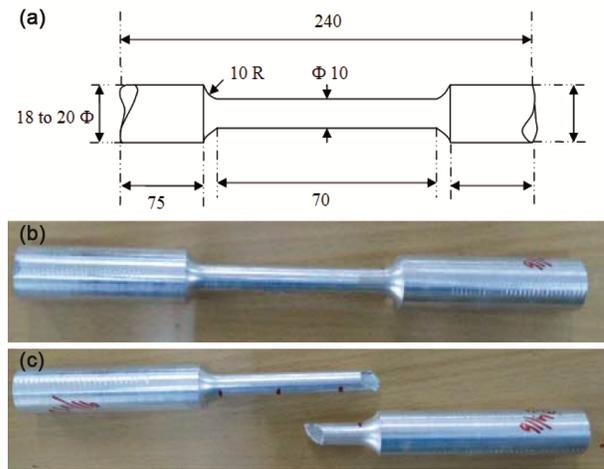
Al test specimen: (a) engineering drawing, (b) before tensile test, and (c) after tensile test
